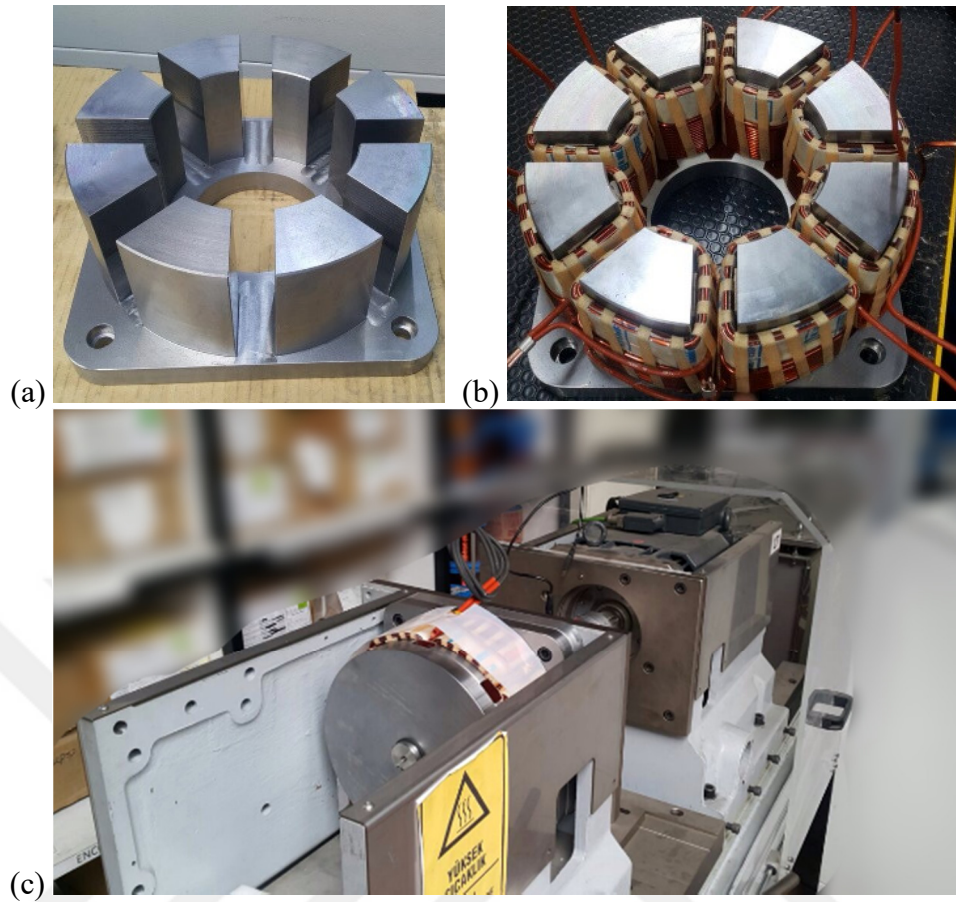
10.5 kW AF-ECB prototype: (a) Stator core made of solid ST37, (b) stator with windings, (c) assembled prototype and test system
